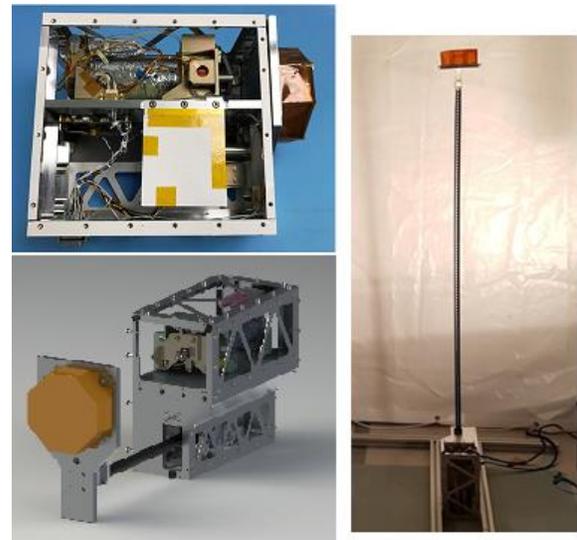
Top Left: inside the Harpoon target assembly (HTA); Bottom Left: CAD model of HTA with target partially deployed. Right: HTA with CPRF boom fully deployed during fire testing (HTA at bottom, target plate at top).
